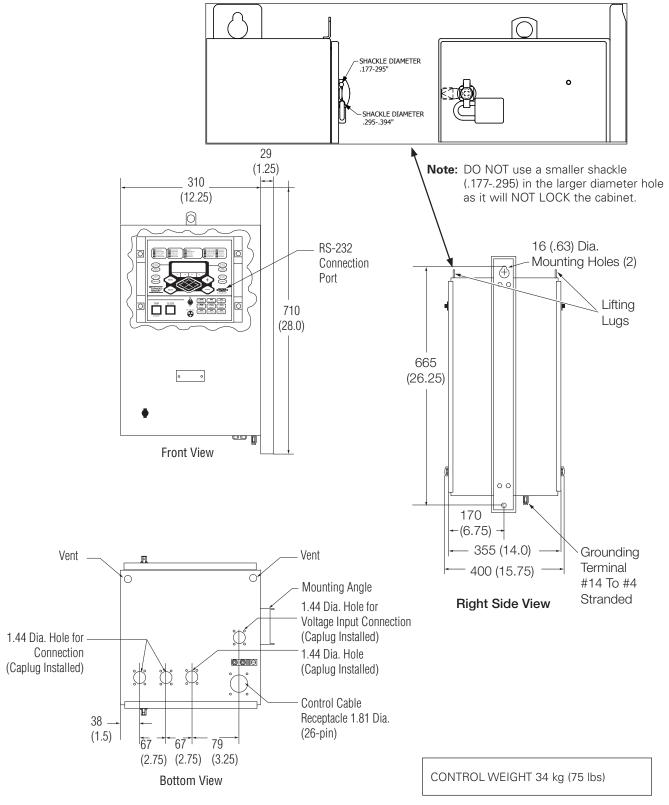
Form 6-TS pole-mount recloser control weight, dimensions, and pad-lock shackle diameters
